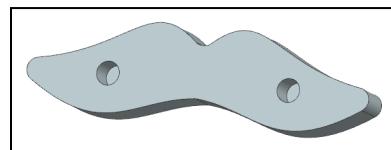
CAD model of mustache showcasing pin holes used for attachment.
